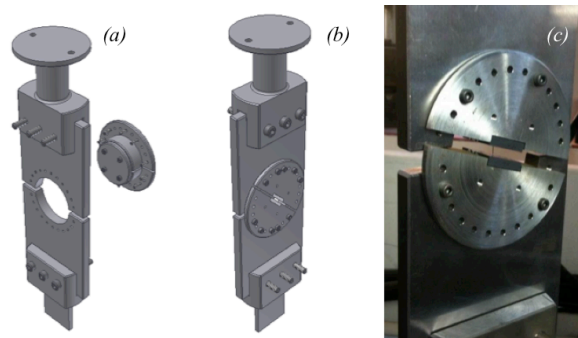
Mixed-mode fixture for single Z-pin testing; (a) back view; (b) front view; (c) assembled jig during a Z-pin pull out test.
